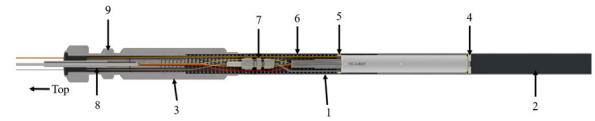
Cross-section view of the MRTI outer can containment design. 1.) Outer can geometry, 2.) graphite spacer, 3.) Outer can top fitting, 4.) Bottom insulation spacer, 5.) Top insulation spacer, 6.) compression springs, 7.) Swagelok fitting, 8.) Leadout potting cup, and 9.) Top compression seal fitting.
